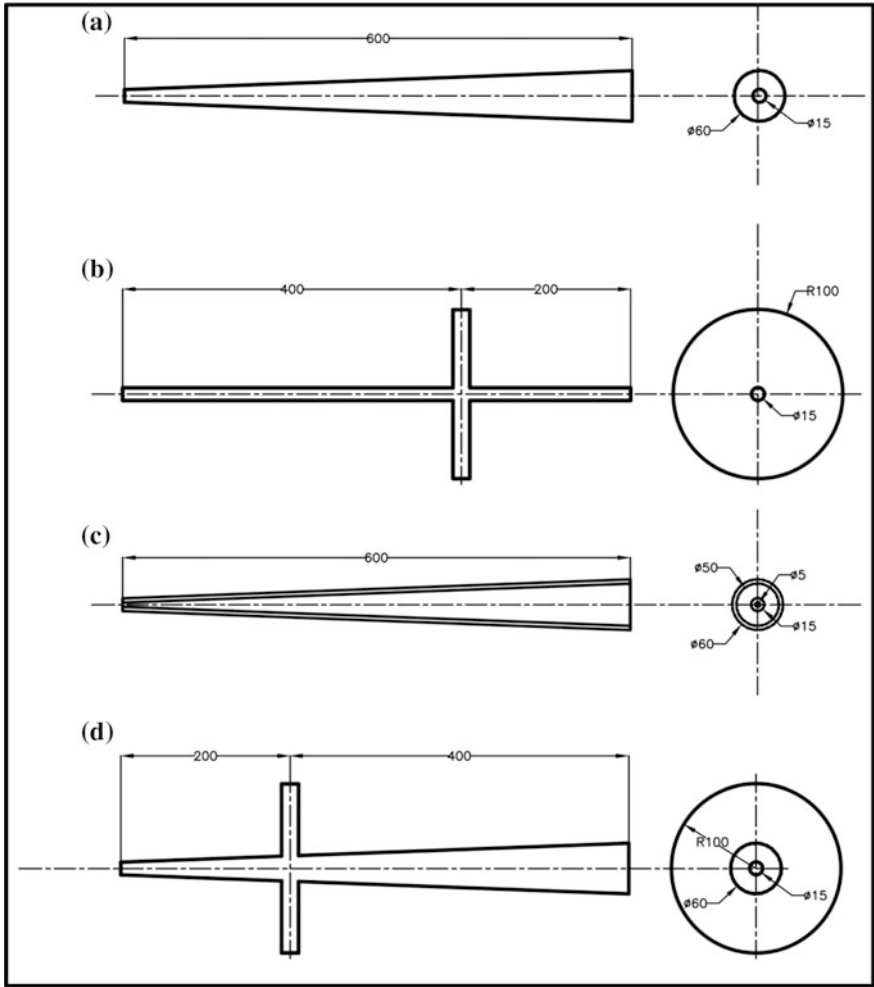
Rotor model for numerical analysis—a solid tapered beam, b solid uniform rotor with eccentric disc, c hollow tapered beam and d solid tapered rotor with eccentric disc
